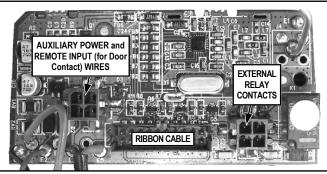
FIG. B: SOCKETS LOCATED IN THE "INSIDE HOUSING" CIRCUIT BOARD
